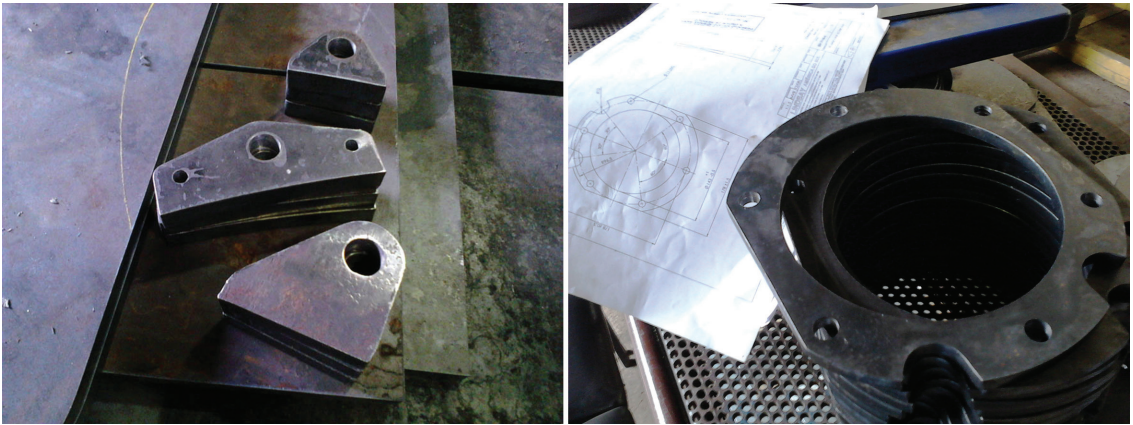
Parts commonly produced by the company's CNC plasma cut machines.
